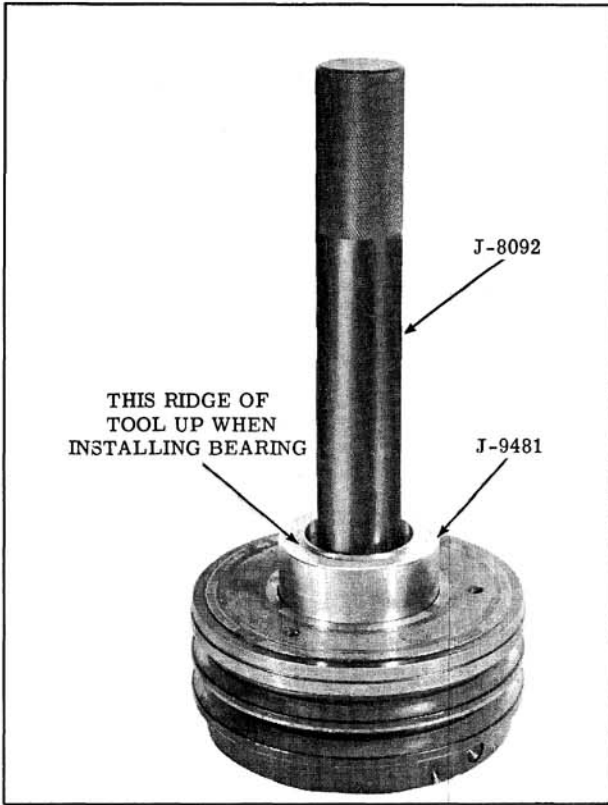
Installing Pulley and Drive Plate Bearing
